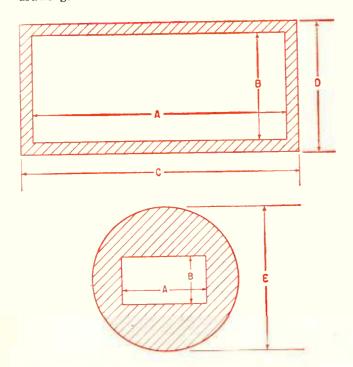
Key to dimensions given in Table I. Cross sectional views of two types of rectangular waveguide are shown
